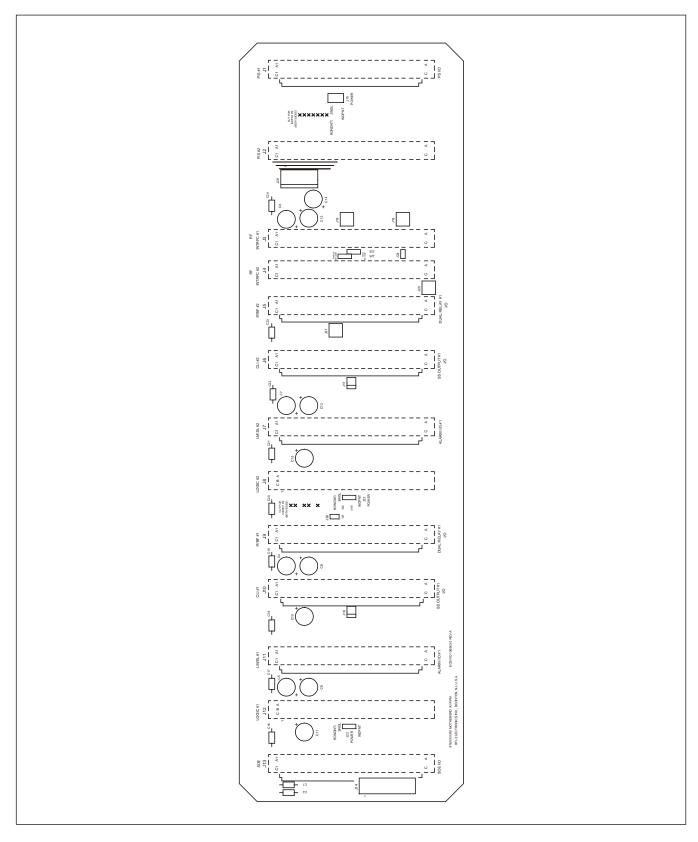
Component locator drawing, RFL 9780 Tx/Rx Motherboard (Assembly No. 106560-2)
